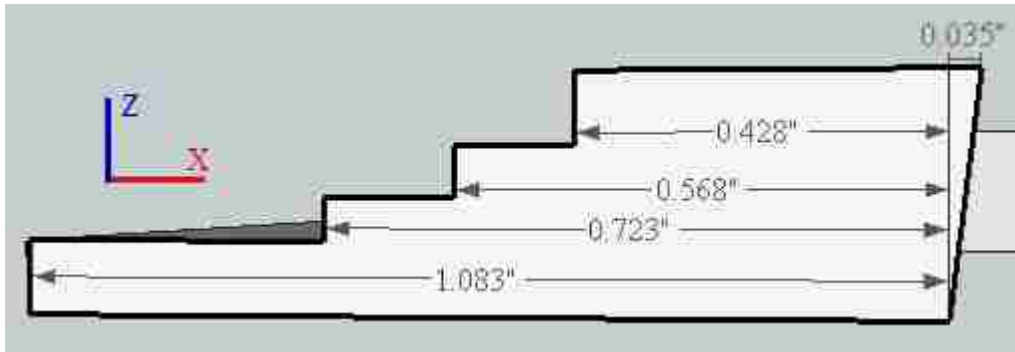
Cross sectional view of the 20x20 cm² middle trimmer lead plate illustrating the in-plane and cross-plane lateral dimensions of the plate. The middle trimmer is square, such that all non-hole dimensions are equal in the in-plane and cross-plane dimensions.
